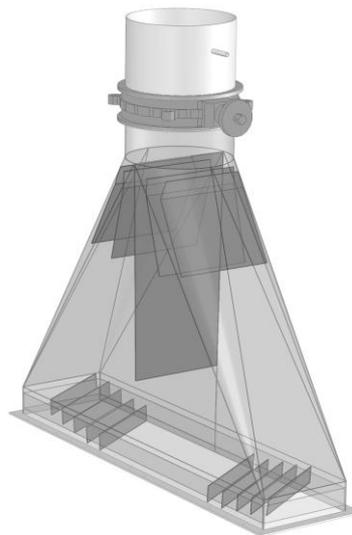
3D sketch of the optimum inlet transition piece with darkened key parts: throttle valve (top) and guiding vanes (middle and bottom)
